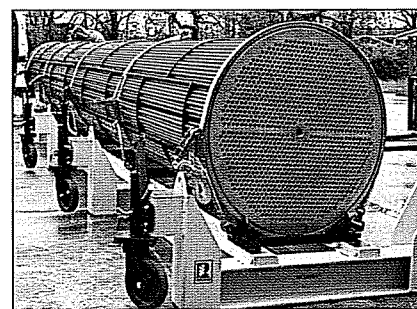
Mobile cart "The Crab" for large main turbine lube oil cooler bundle
